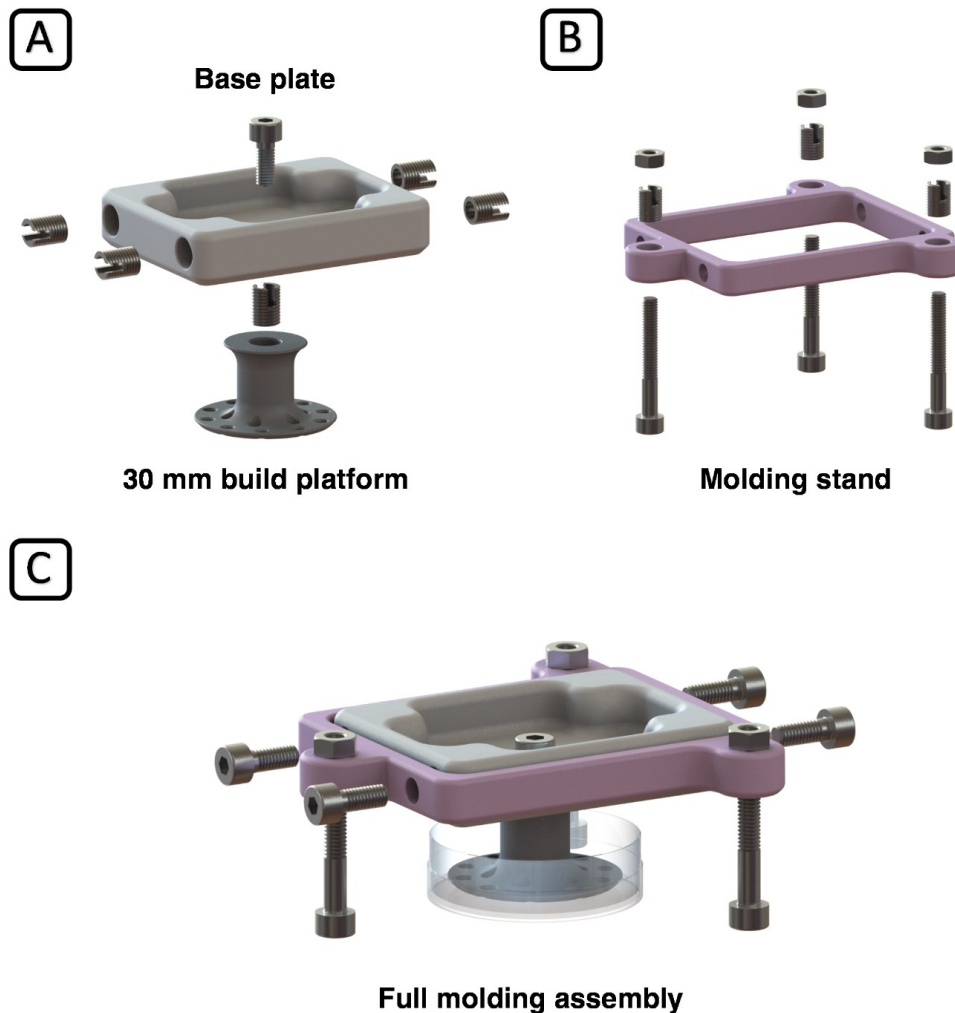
Detailed overview of the mSLab build platform (4K version). Detailed overview of the build platform assembly (A), molding stand with three screws for leveling (B), and the complete molding assembly used to cast silicone around the build platform (C), including the positions of the thread inserts and screws. (Images from Kaufmann et al. 2024)
